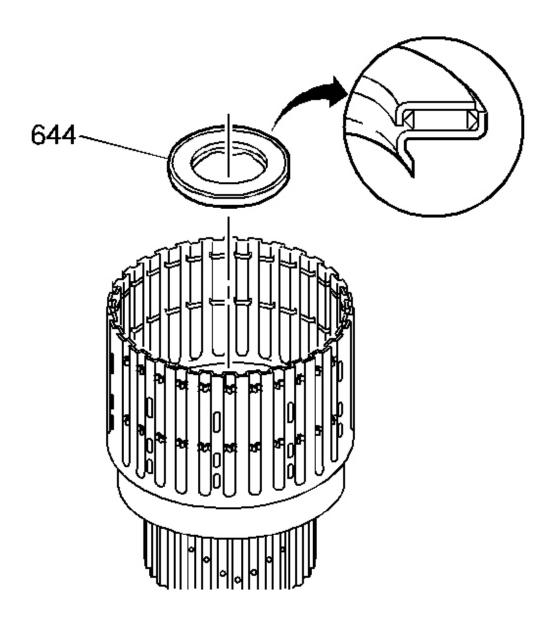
Locating Input Shaft Thrust Bearing Assembly Courtesy of GENERAL MOTORS CORP.
